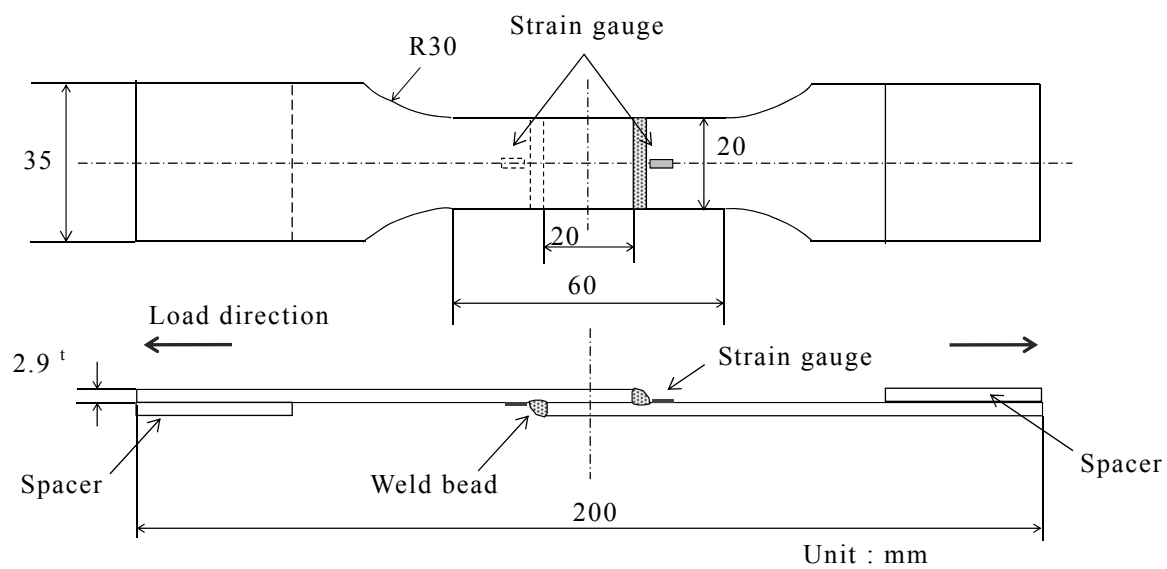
Schematic of arc welded lap joint test piece
